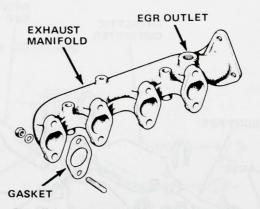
K-6 Exhaust Manifold—Four-Cylinder
